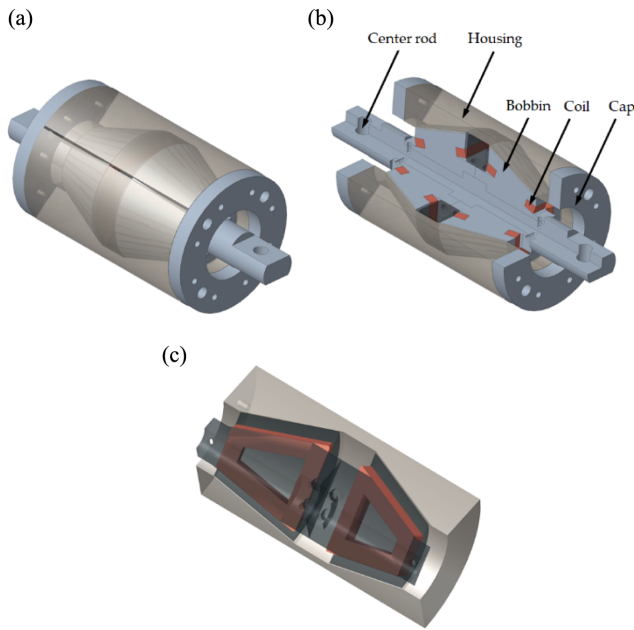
Structure of variable stiffness joint using MRE, (a) Isometric view of the joint, (b) 3/4 Sectional view of the joint and (c) One assembly of bobbin-coil-housing, i.e. a quarter of the joint
